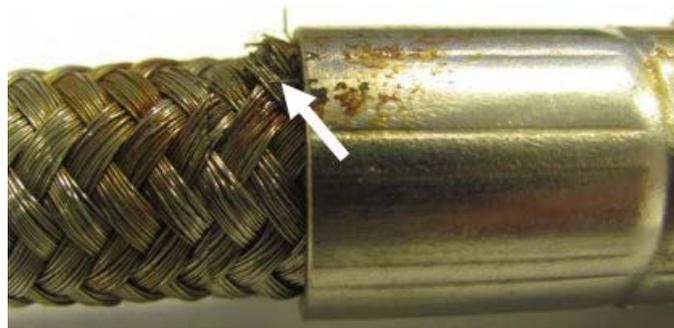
Corrosion at the braid and fitting. A pen shows where a leak is located.
